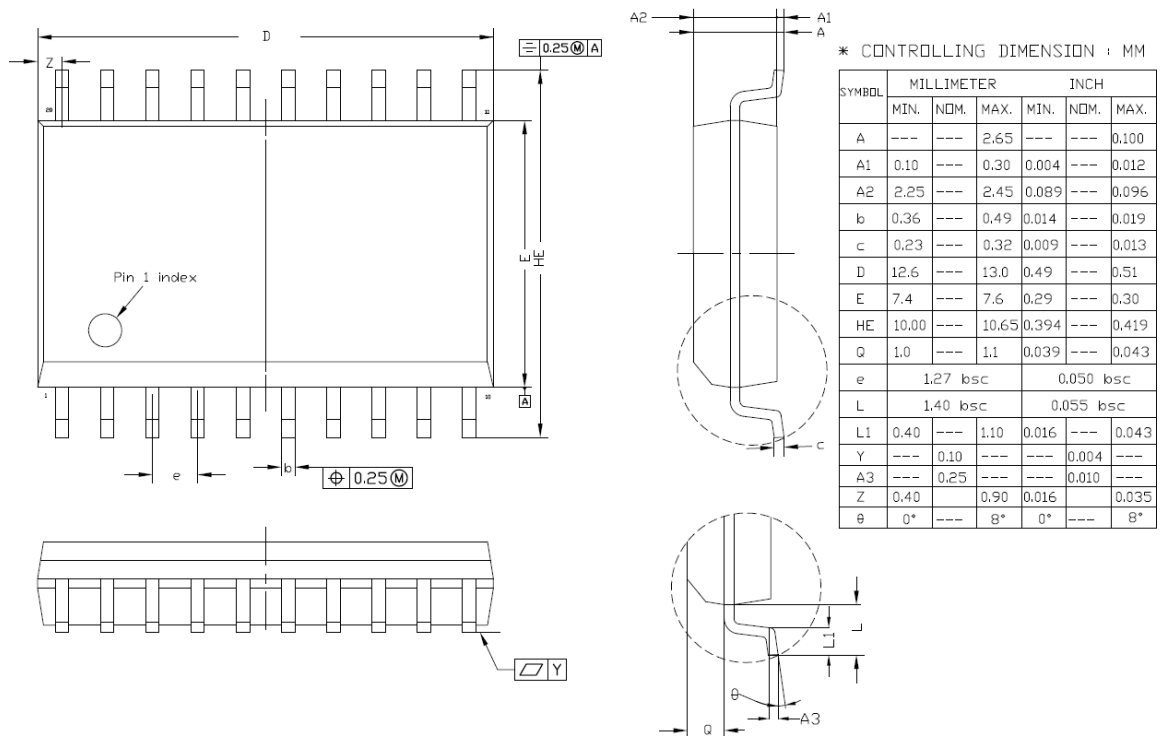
SOW20 Package Shape and Dimension in millimeters
